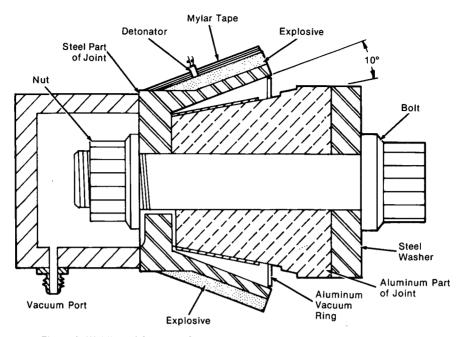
Welding of Stainless-Steel Member to Silver-Aluminum Interface
